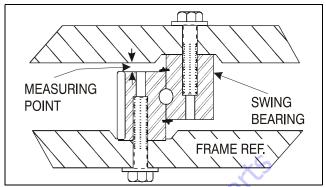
Swing Bearing Tolerance Measuring Point
